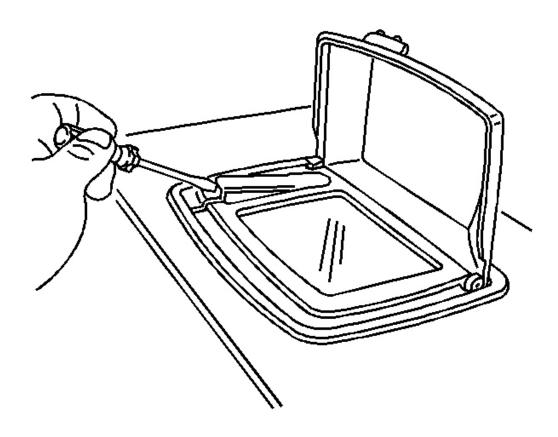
Exposing Rear Retaining Tab Courtesy of GENERAL MOTORS CORP.
